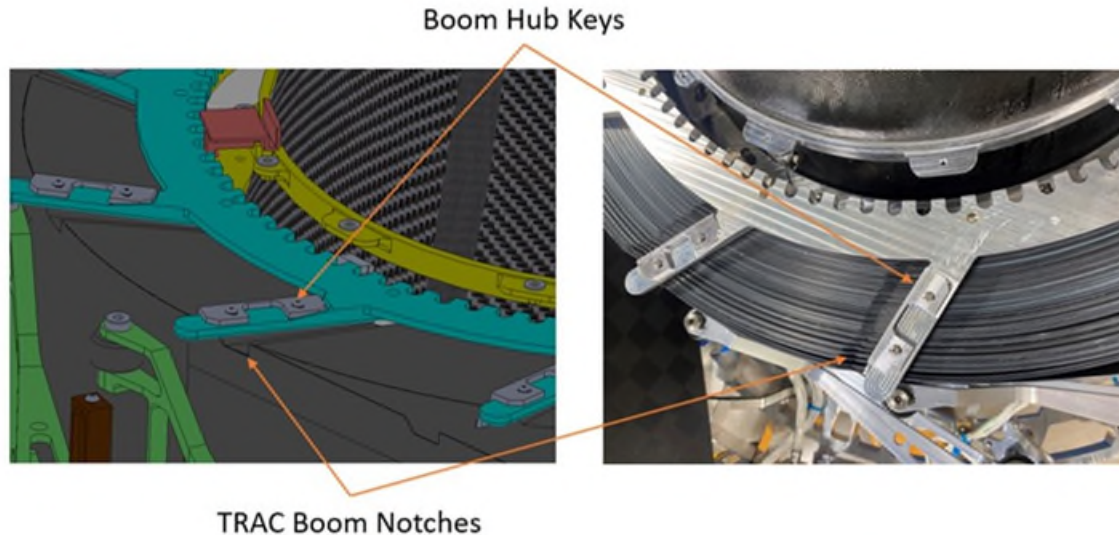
Keys and notches shown in the Solar Cruiser CAD (left) and actual prototype (right).
